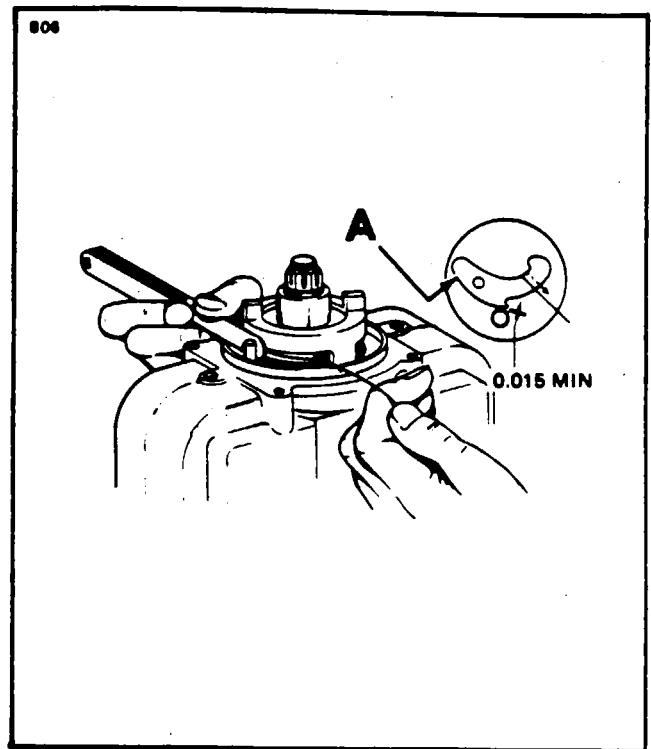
Checking Flyweight to Stop Pin Clearance
